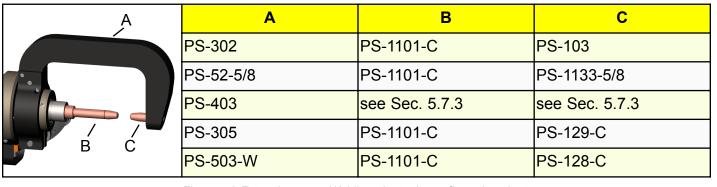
Extension arm - Welding electrode configuration chart
